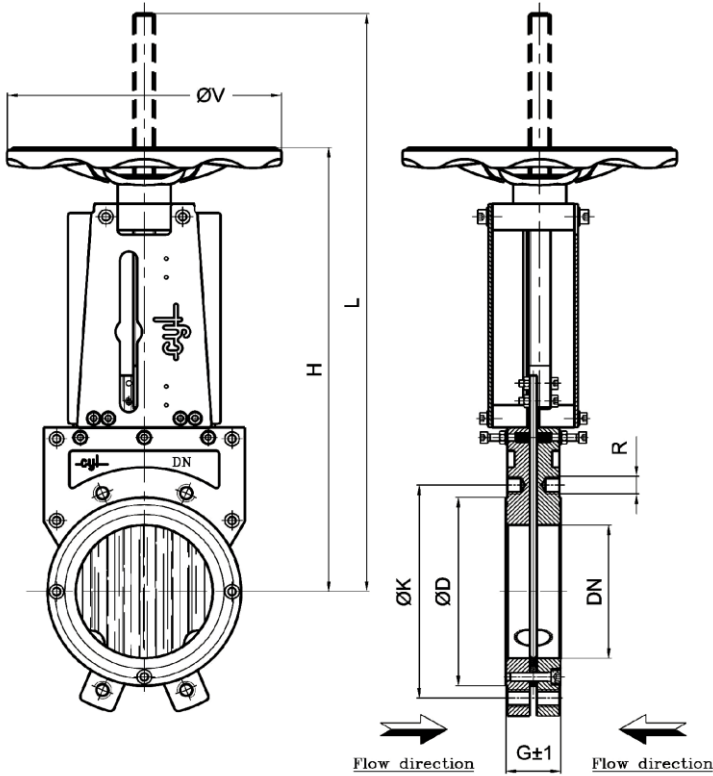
KGV XD series semi lugged rising stem with handwheel & gearbox\
